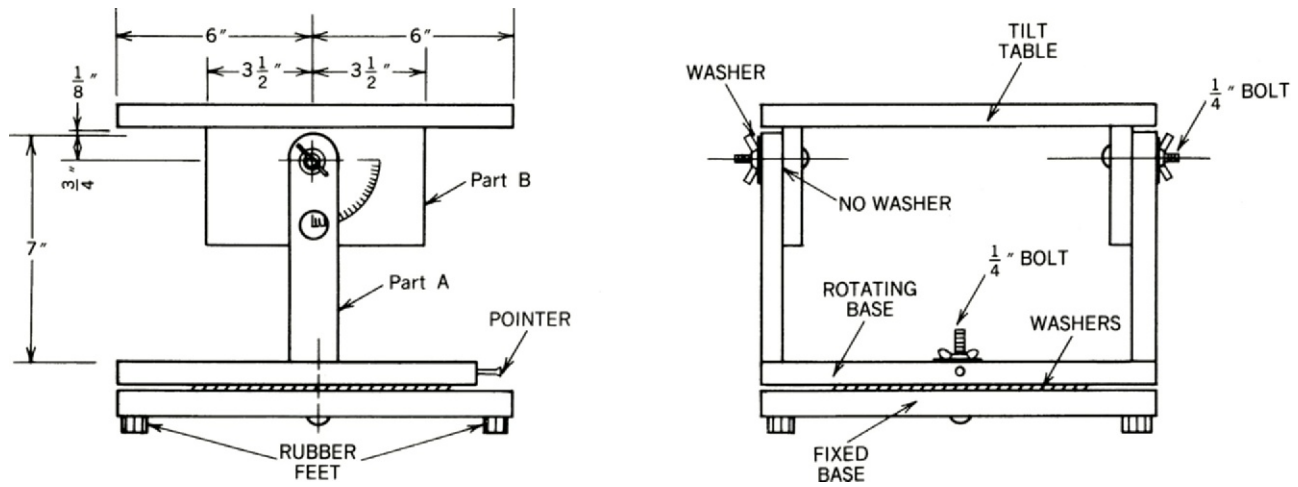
West elevation (left); south elevation (right). When working in SI units, use dimensions that are convenient, because actual size does not matter.
